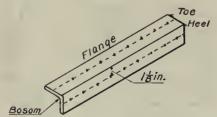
LAYOUT OF BOTTOM ANGLE.
